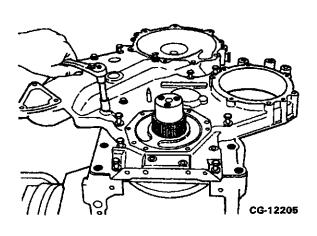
Remove Crankcase Front Cover (With Engine in Vertical Position)
